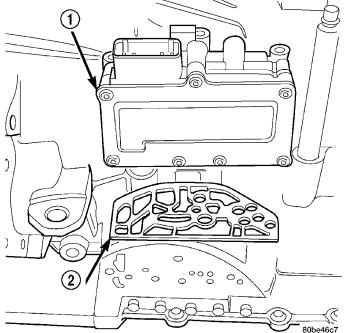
Solenoid/Pressure Switch Assembly and Gasket
